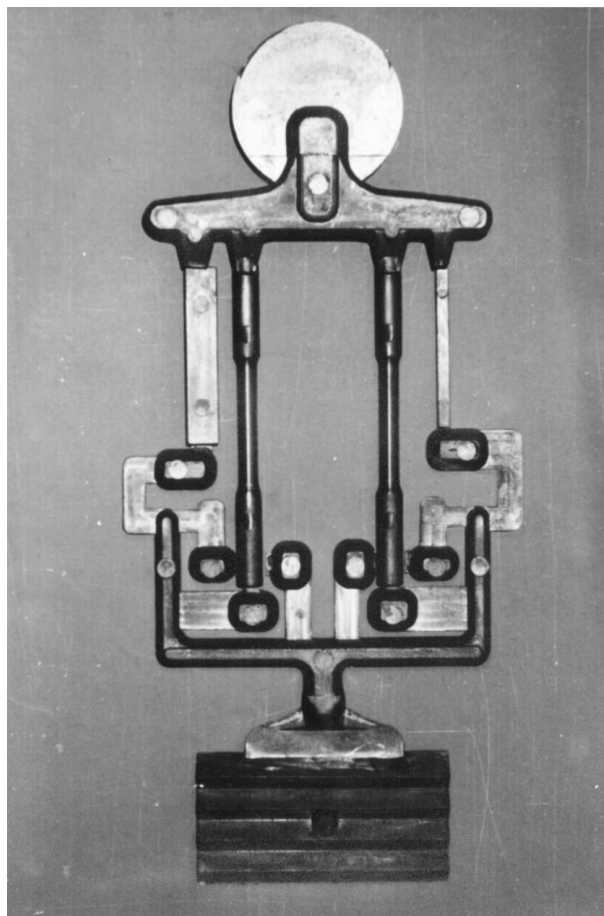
Tensile, impact and three-point bending test samples made by die casting.
